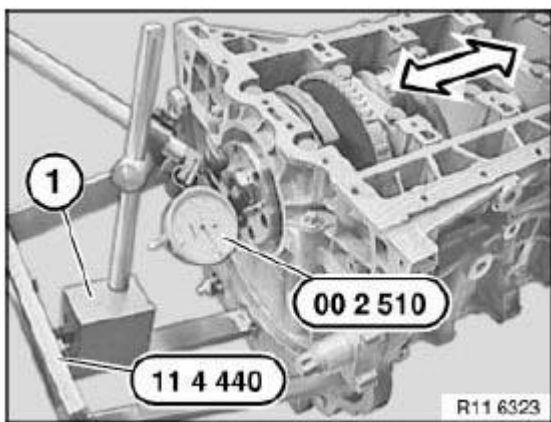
Setting Up Stand With Magnetic Base On Special Tool 11 4 440
